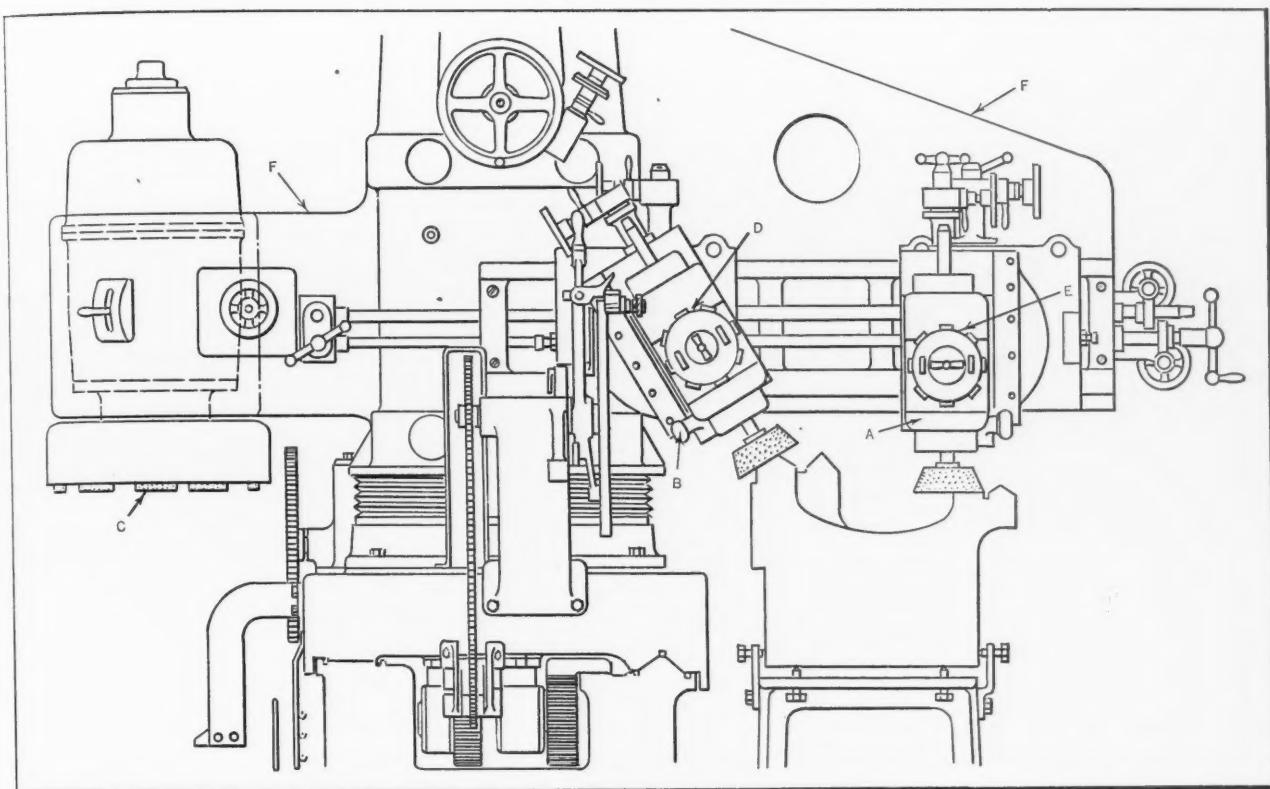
End View of Way Grinder of Traversing Head Type, Showing Application to Lathe Bed
